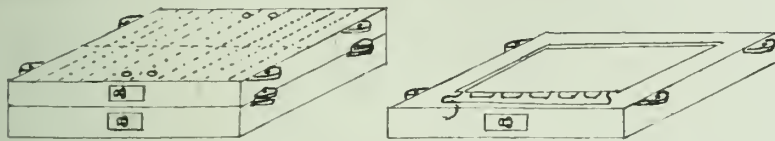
CLOSED MOLD, AND DRAG READY FOR SECOND USE OF COPE PART. WHEN MOLDING COPE FLASKS.
